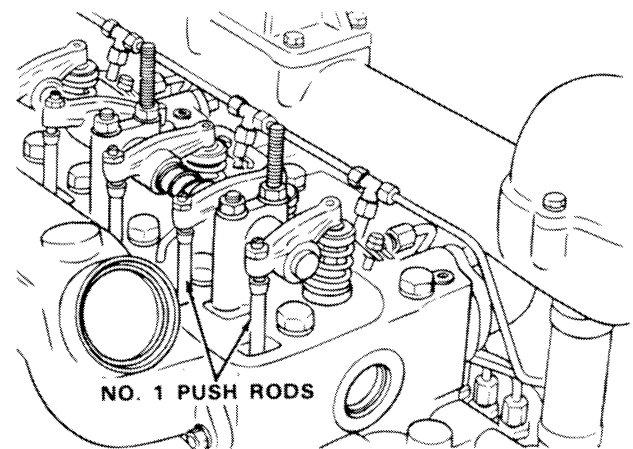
Adjusting Tappets, Cold Setting (Sheet 1 of 2)
